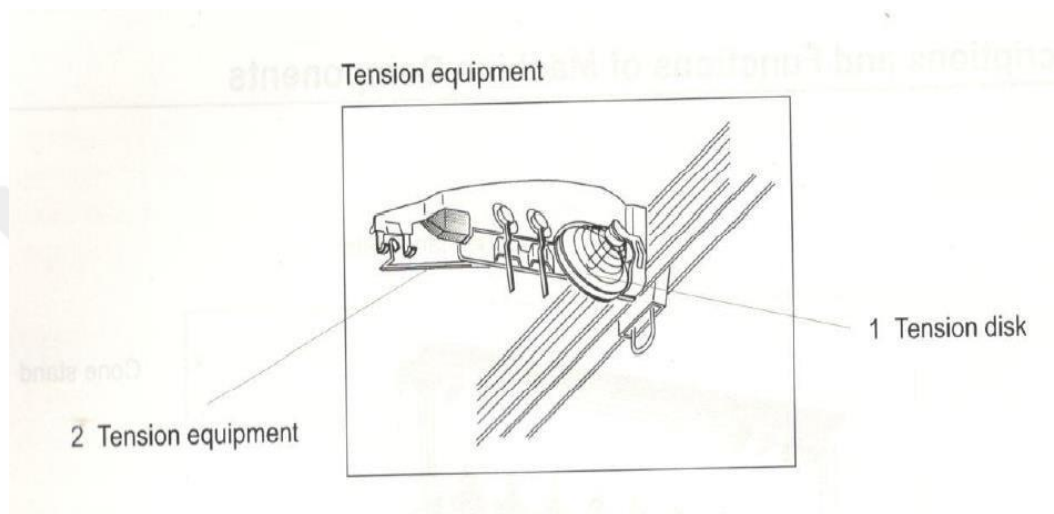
Machine schematic view of Shima Seiki NSSG122 [18]
